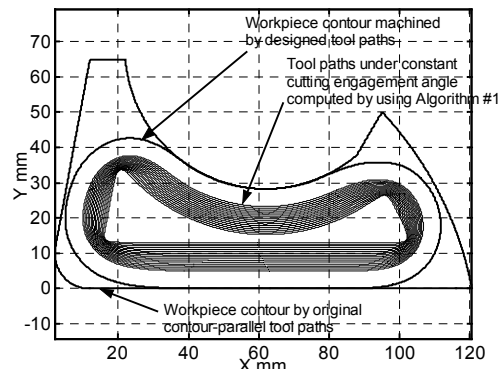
An example of tool paths under constant cutting engagement angle computed by using Algorithm I
